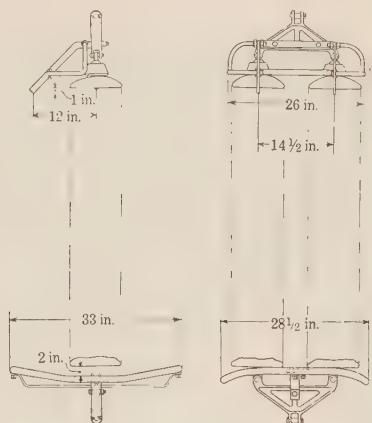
ARCING RING AND HORN ASSEMBLY (1926 INSTALLATION) FOR DEAD END STRING PHILO-CANTON LINE
